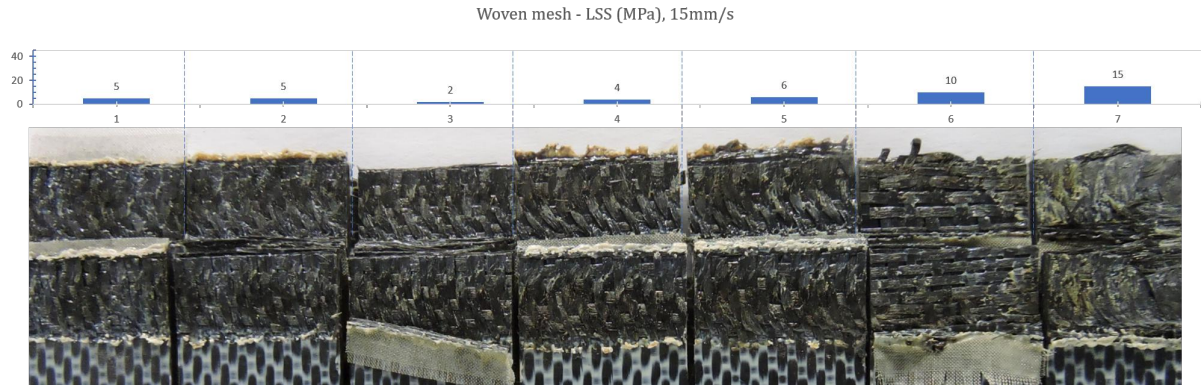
The fracture surfaces at a welding speed of 15mm/s
